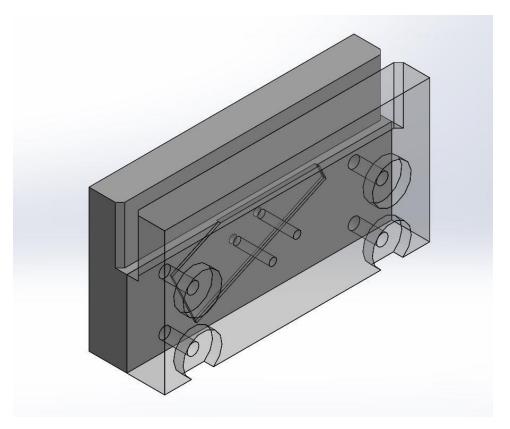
Conveyor Belt Slicer Version 2 Assembled
